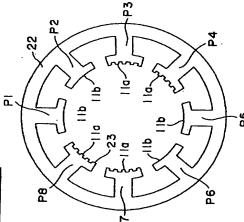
It is drawing of longitudinal section of the conventional rotation form linear pulse motor.
